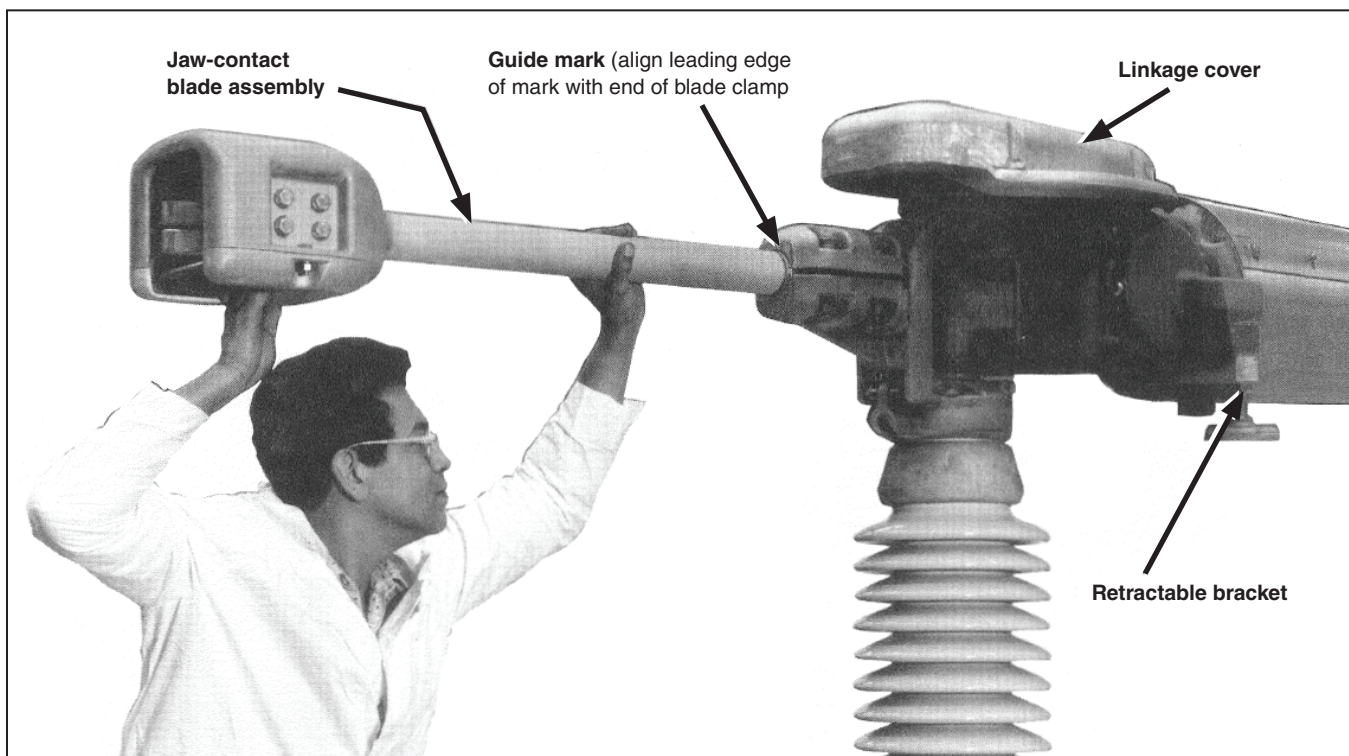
Inserting the jaw-contact blade assembly at brain end (1600 ampere rating shown.)
